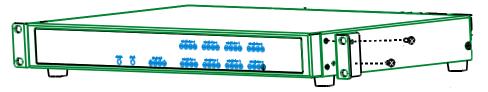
Bracket Attachment for Rack Mounting (MVP2410/3010 or MVP410/810)
